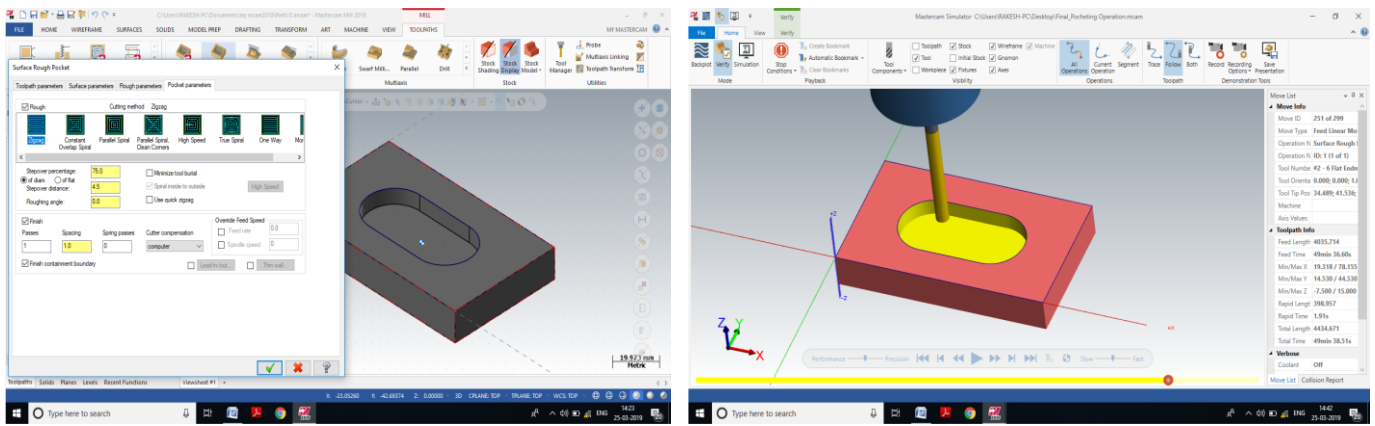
Applied Zig-Zag Tool path and Simulation
